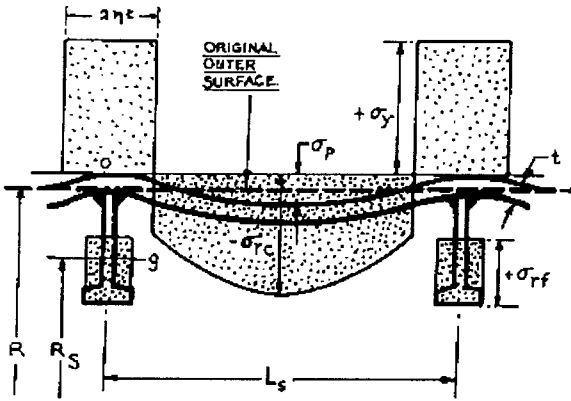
Hoop residual stress due to stiffener-shell toe welding
